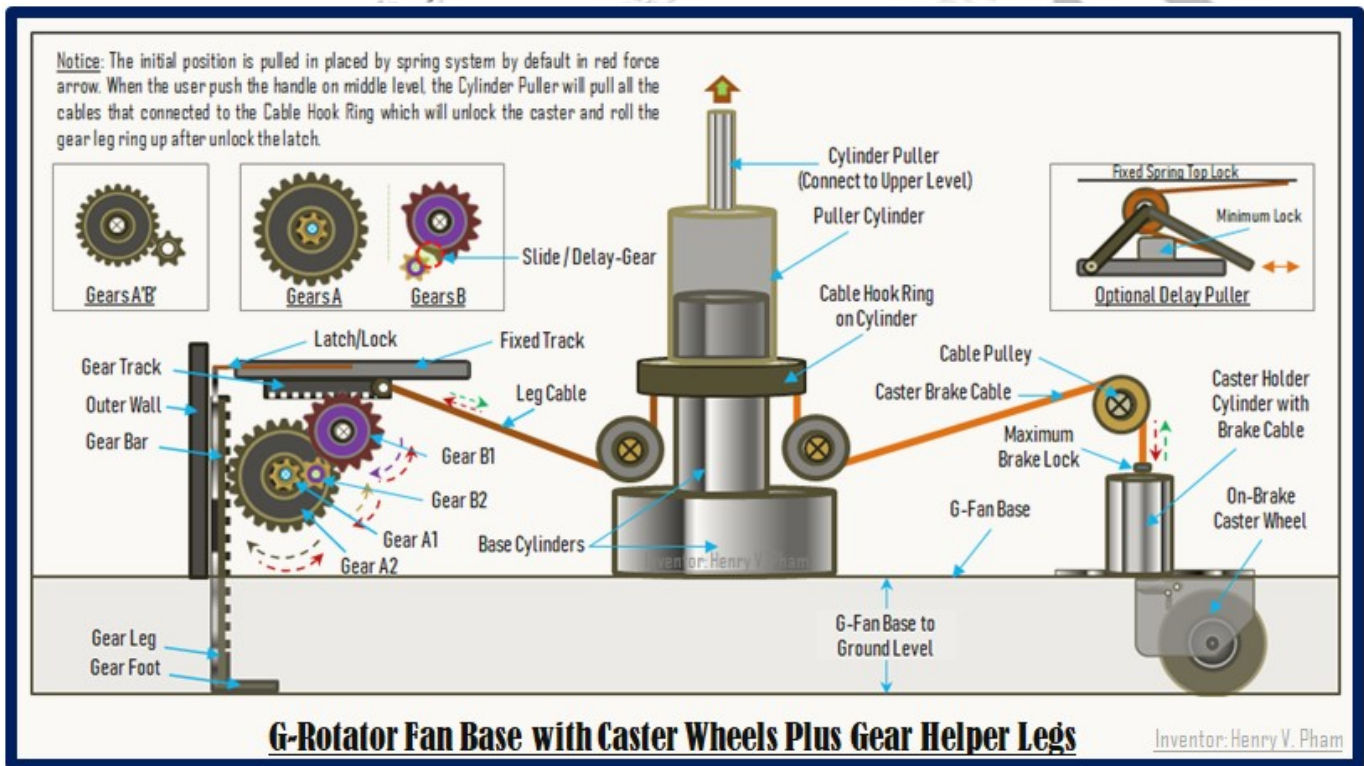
360° Stand G-Rotator Fan – Caster Wheels & Gear Helper Legs Lock/Unlock Mechanism Overview
